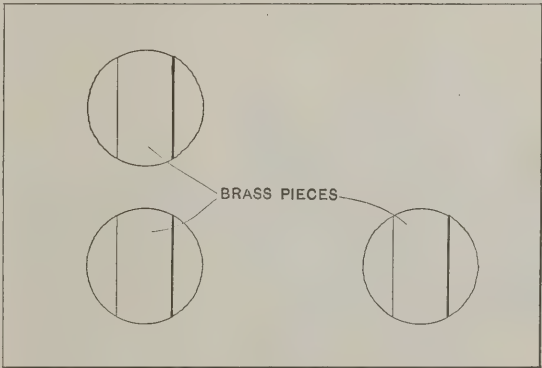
Cored Holes with Inserted Brass Pieces for Centers.
